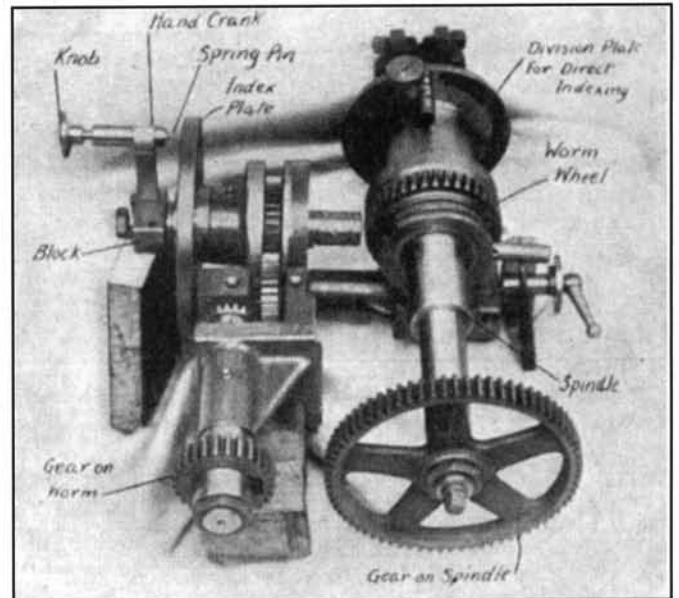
A view of the internal mechanism, looking from the rear of the spindle end on to the top.
